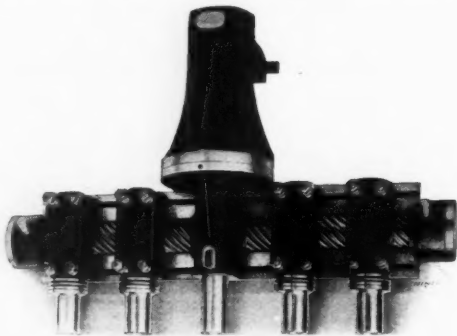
Sellew "Straight Line" Auxiliary Drill Head
